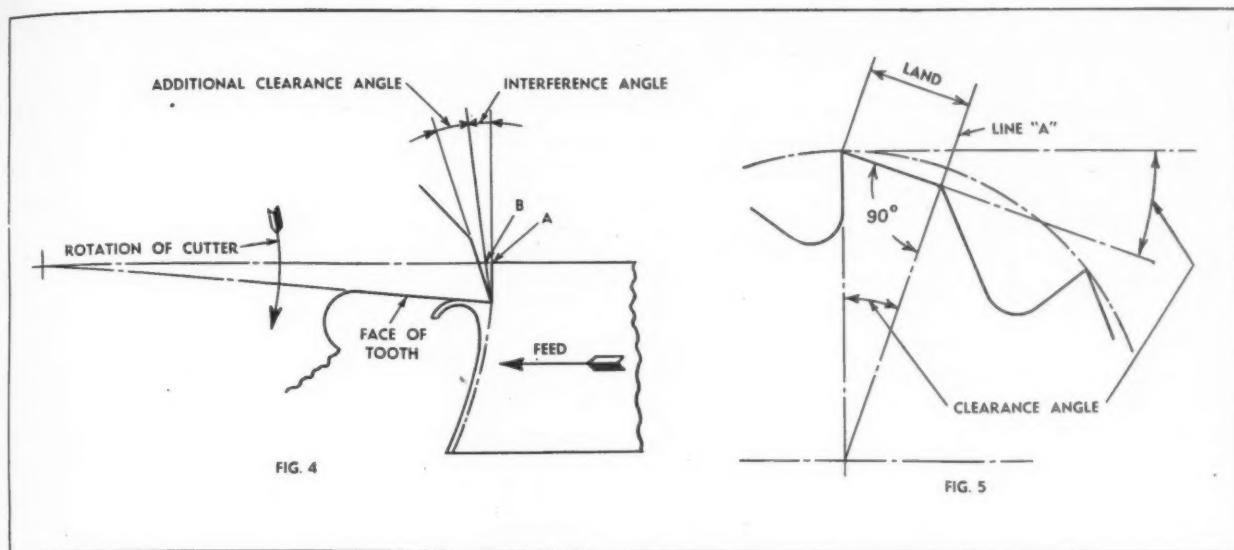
Diagram Illustrating Method of Calculating Proper Clearance Angle for Lands of Milling Cutter Teeth. Fig. 5. Diagram Showing Relation of Clearance Angle to Width of Land on a Milling Cutter Tooth
